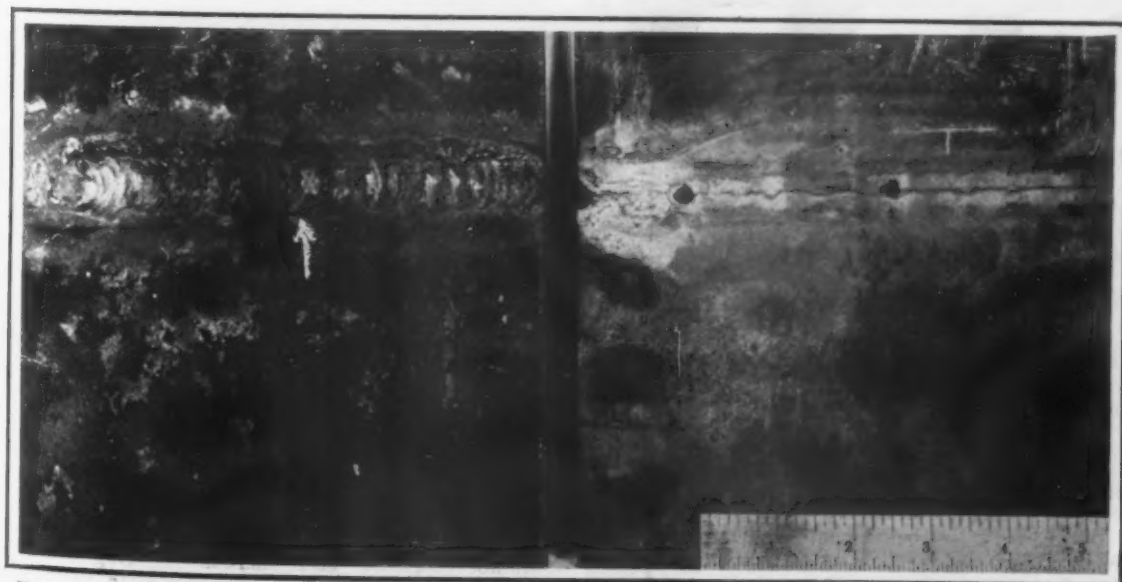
A Front and Back View of the Welded Sheets. This particular one is the bead side of welded sheet No. 12, nickel-chromium, $\frac{1}{8}$ -in. thick, parent metal melt bar, which developed a shrinkage crack (arrow)
